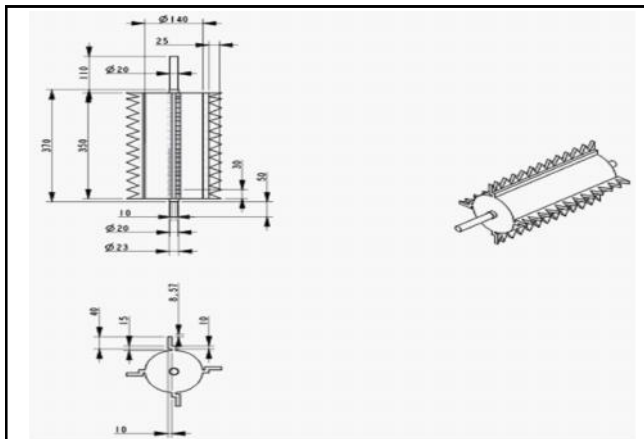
Fig. C : Top view and front view of cylindrical roller with brush type blades (tooth plates)
